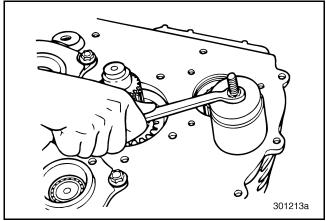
Using Tool J 34630 to Remove Reverse Idler Shaft
